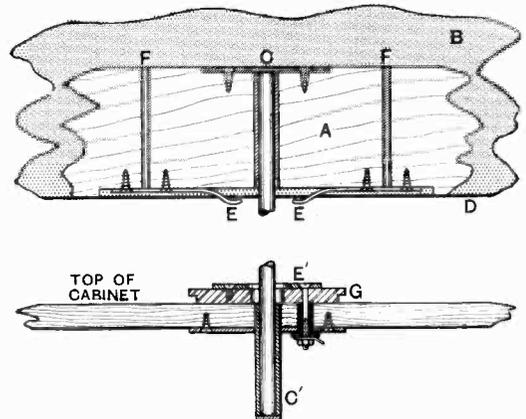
Details of the combined spindle and contact arrangements for the frame. {The disc G is undercut to take the compass card.
